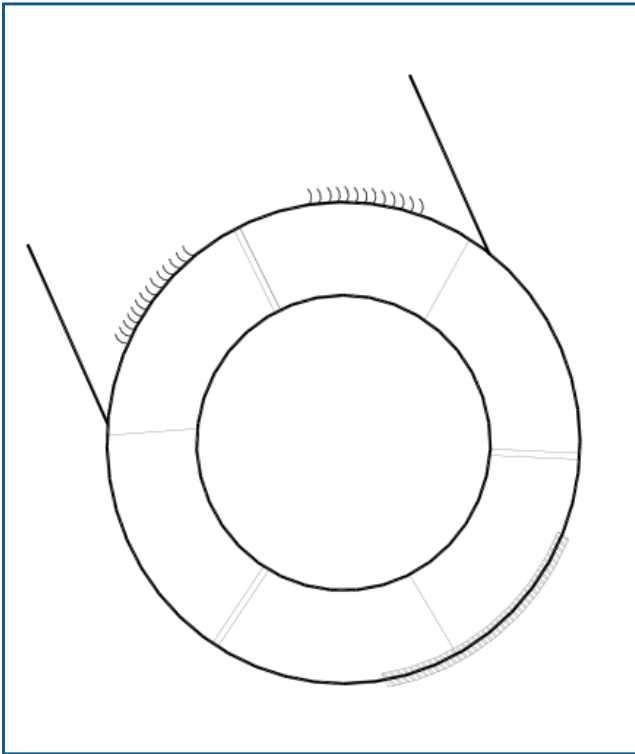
UPPER THRUST WASHER, FULLY SEATED READY FOR WELDING TO THE AXLE BEAM
